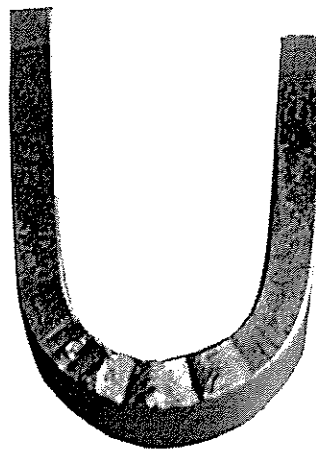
Side bend without porosities in the weld metal
